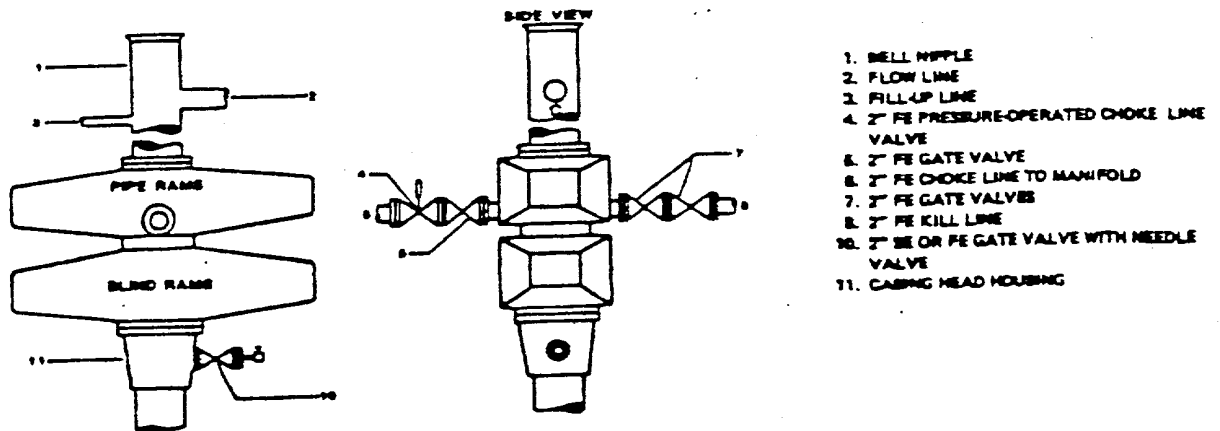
Standard Hydraulic Blowout Preventer Assembly (2 M or 3 M Working Pressure) Alternative (without Drilling Spool)
